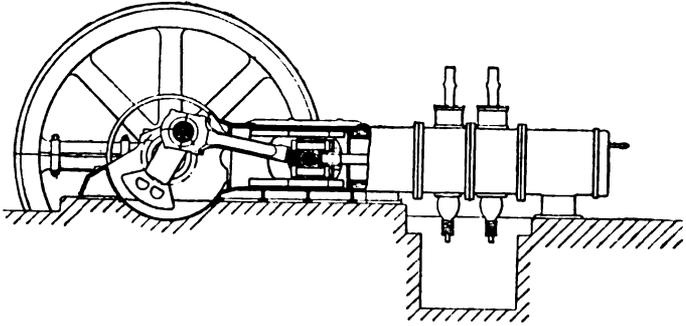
Dingler Gas Engine, part sectional elevation.
